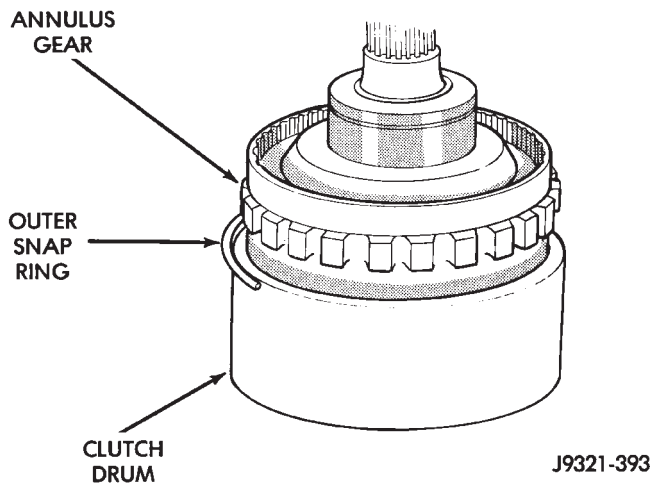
Clutch Drum And Outer Retaining Ring Installation
